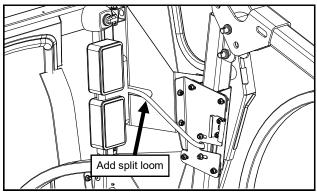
(Assemble OEM Side Lights to Cab)
